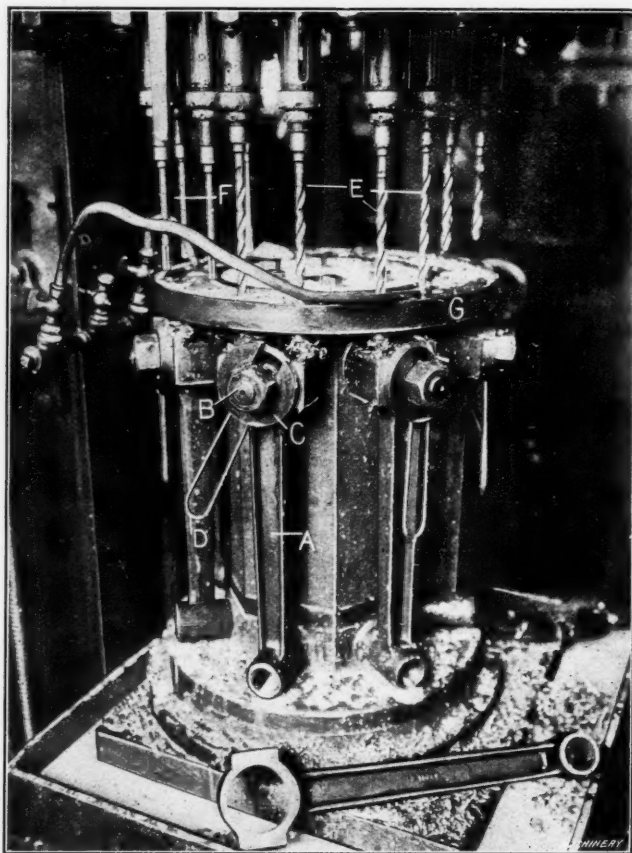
Closer View of the Rotating Connecting-rod Jig shown in Fig. 1
